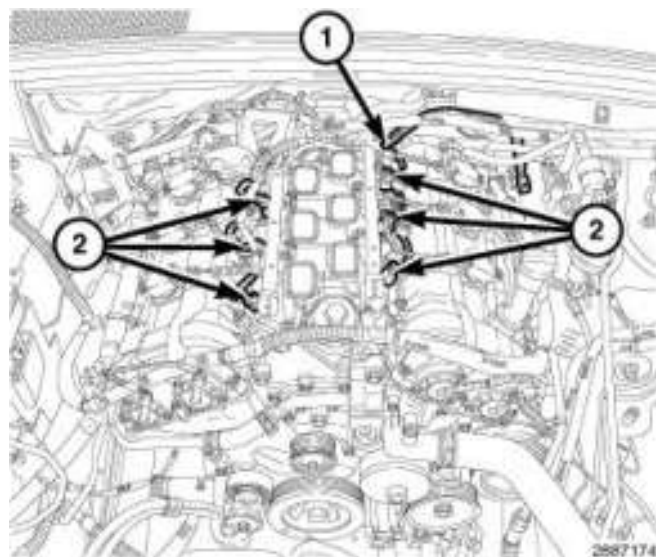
Fuel Supply Hose & Fuel Injector Electrical Connectors
